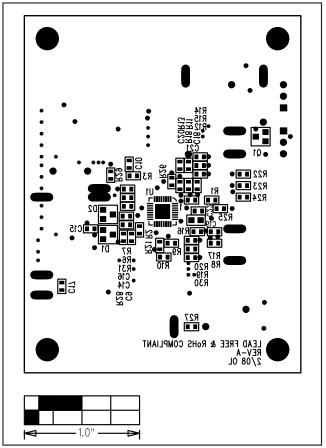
MAX17020 EV Kit Component Placement Guide—Solder Side
